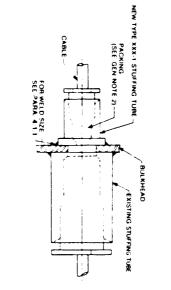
B45. Changing stuffing tube sizes to accommodate larger cable.
